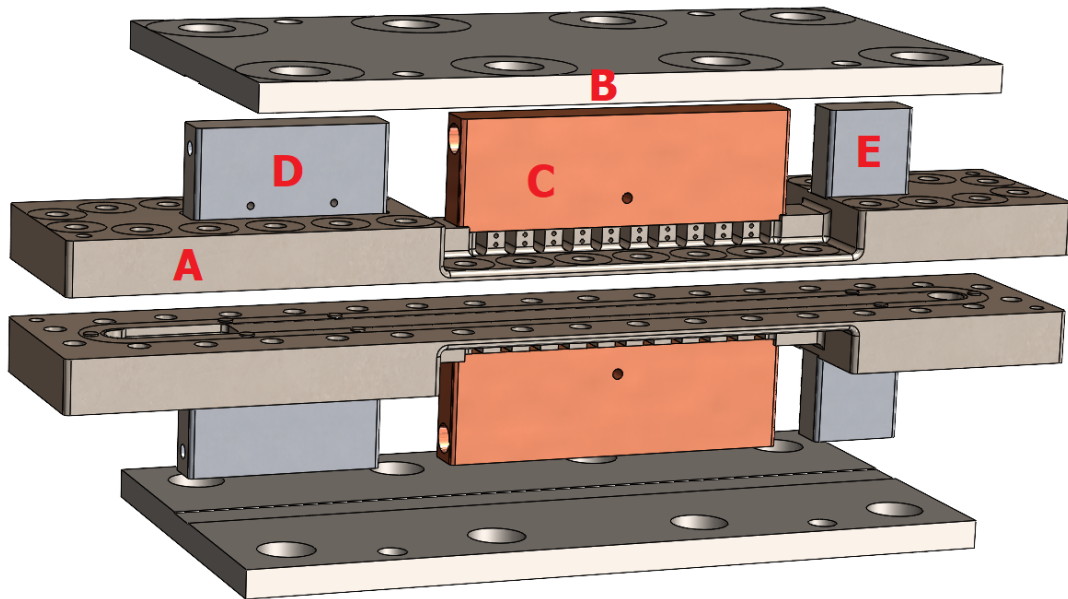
Exploded view of the beta test section modeled in Solidworks
